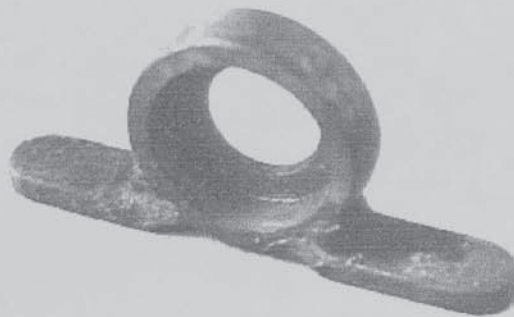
Housing made from welded steel, machined in a lathe. Ball bearings are inserted using a hand press.
